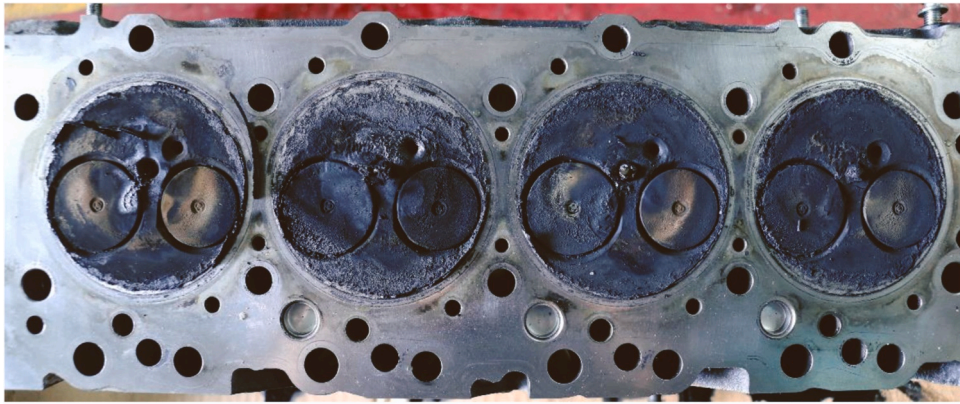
The condition of cylinder head of the degummed CPO engine after 500 operational hours.
